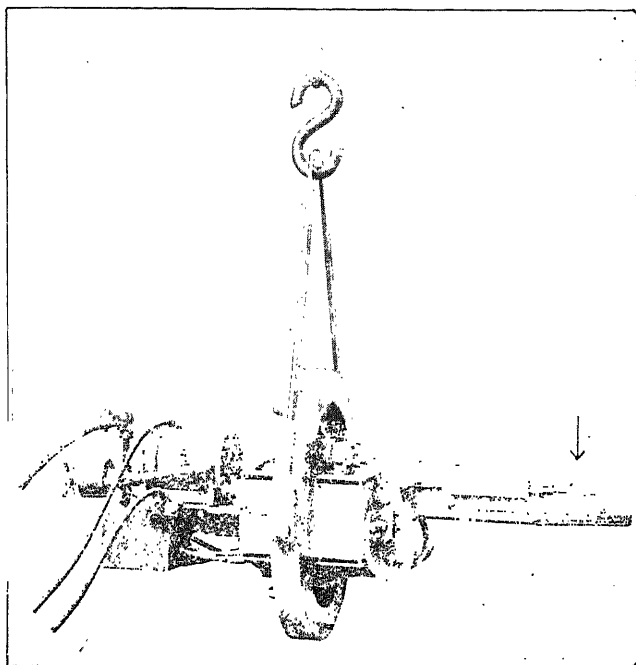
Portable Machine for Mash-Welding Square or Round Rods.
